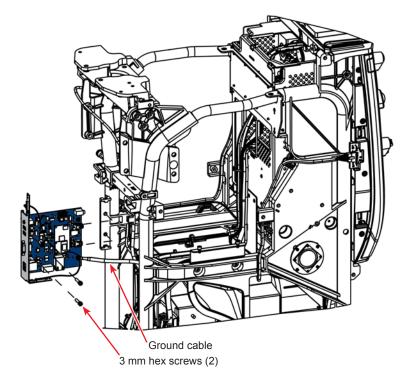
Rear Panel I/O-Wireless Module Assembly Removal
